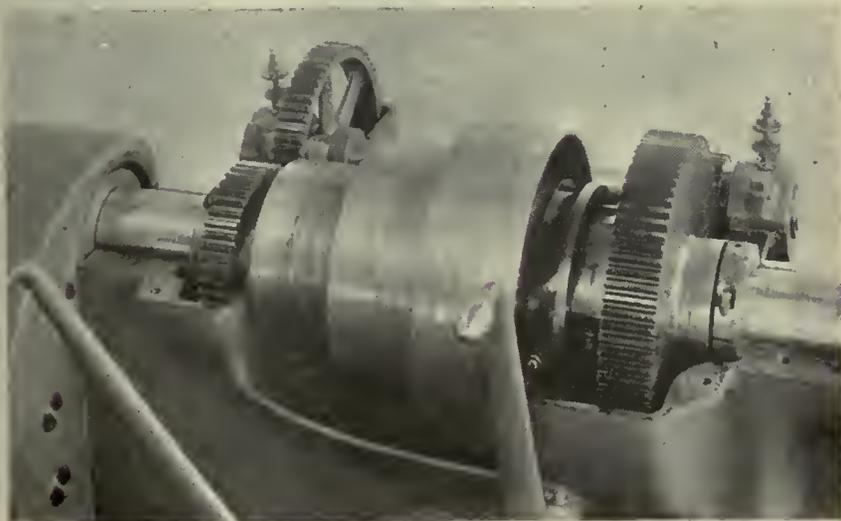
OPEN VIEW SHOWING FRICTION HEAD.
